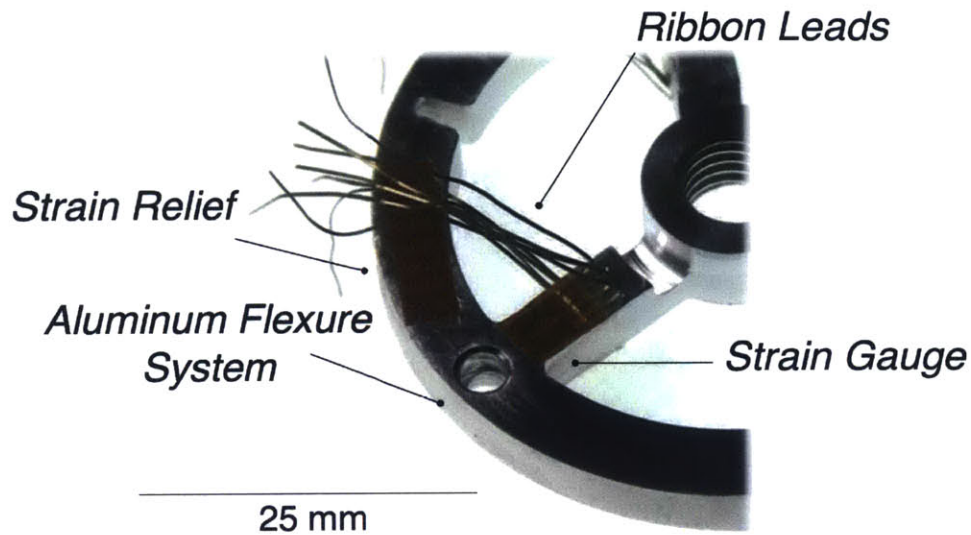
This image shows a dual-grid strain gauge and strain relief pad mounted on the top surface for one flexure. The ribbon leads, which were pre-soldered on this strain gauge package, extend up away from the gauge awaiting insulation and final soldering.
